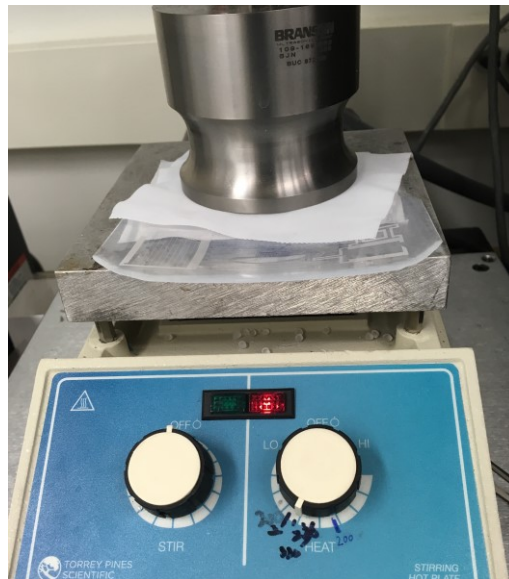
Replicating PDMS patterns in SEBS with thermo-compressive molding process using an embosser on a hotplate.
